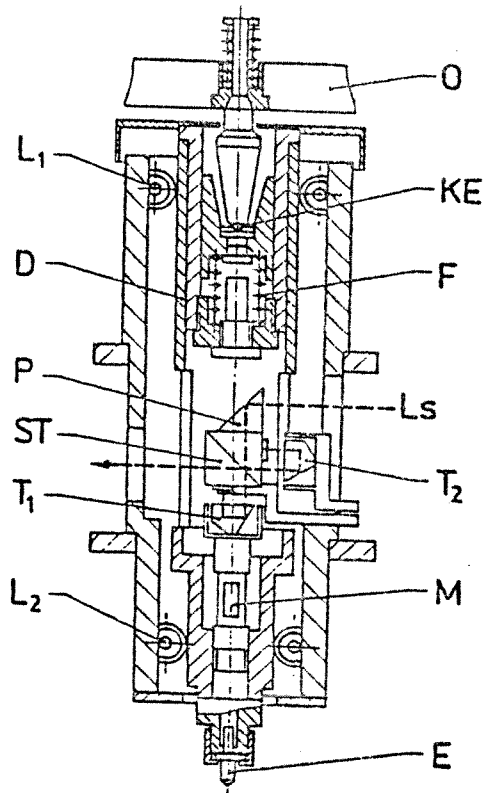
Elements for depth measurement with laser interferometer on the machine shown in Fig. 6
